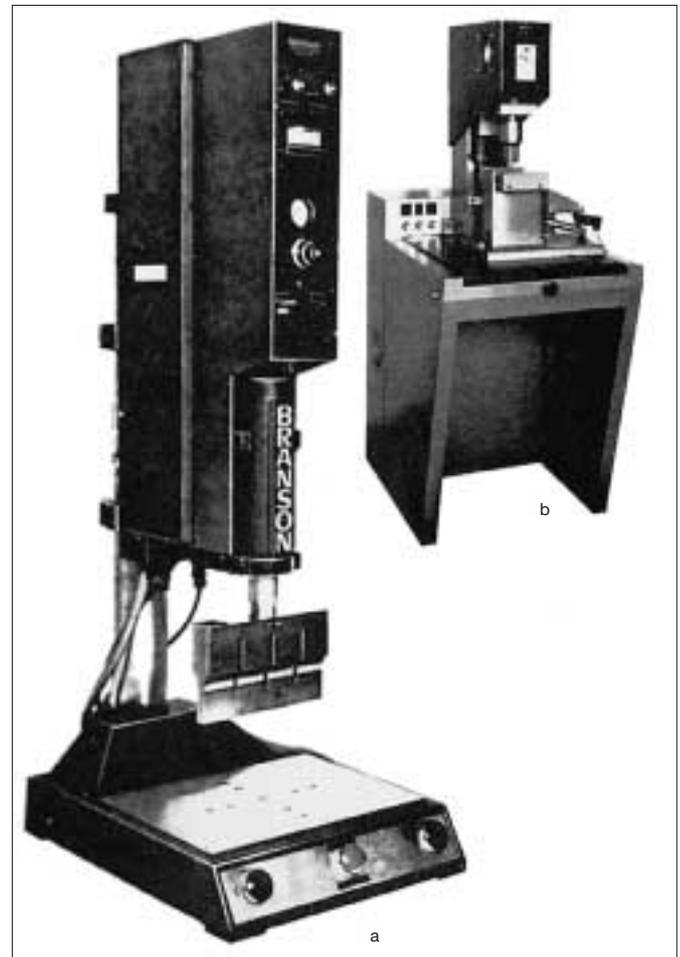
Typical ultrasonic welding machines, *b* with magnetostrictive transducer, *a* with piezoelectric transducer
